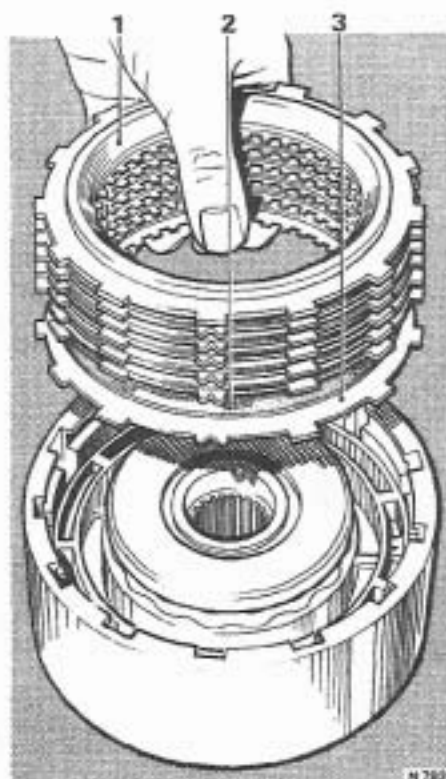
FITTING THE DIRECT CLUTCH PLATES
